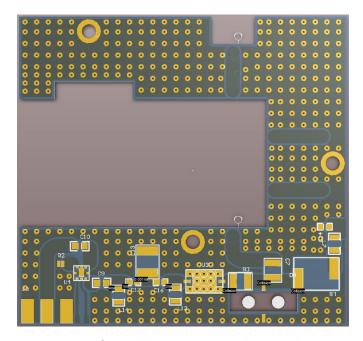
Mini T/R switch low power side PCB layout in Altium Designer
